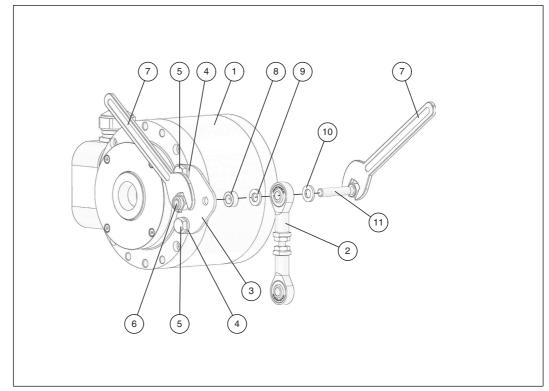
Mounting of the support plate and extension arm on the rotary encoder
